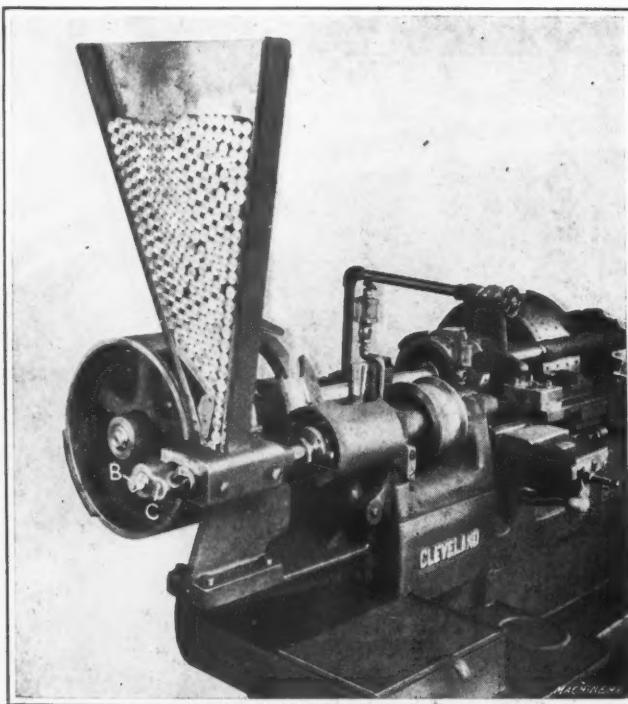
One-half-inch Automatic Screw Machine equipped with a Magazine Feeding Mechanism for delivering Chain Bushing Blanks to the Chuck for performing a Drilling Operation
